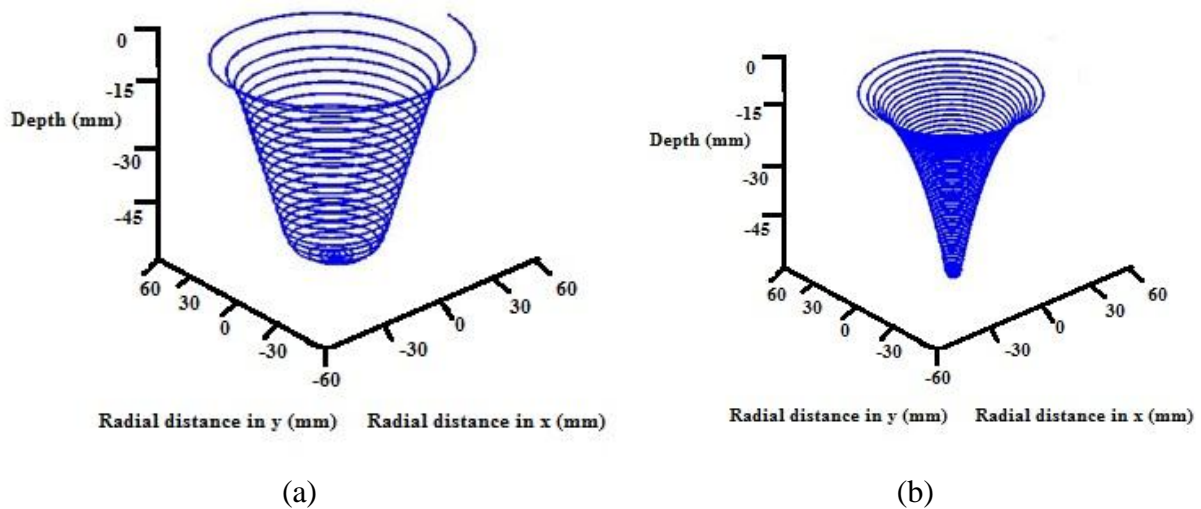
(a) Tool path for cone shaped object and (b) tool path for funnel shaped object
